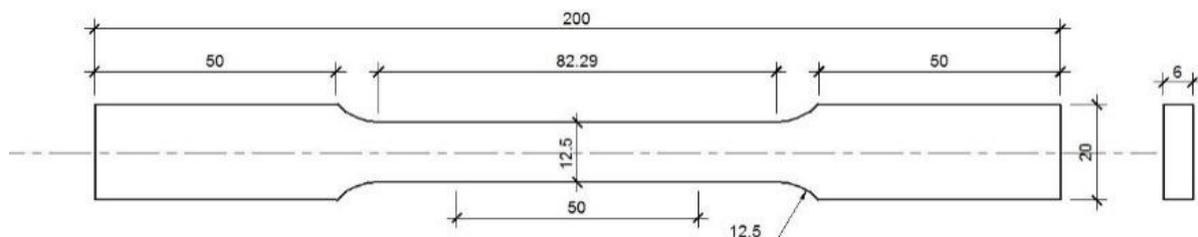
Tensile test specimen ASTM E8/E8M-09 [4].
